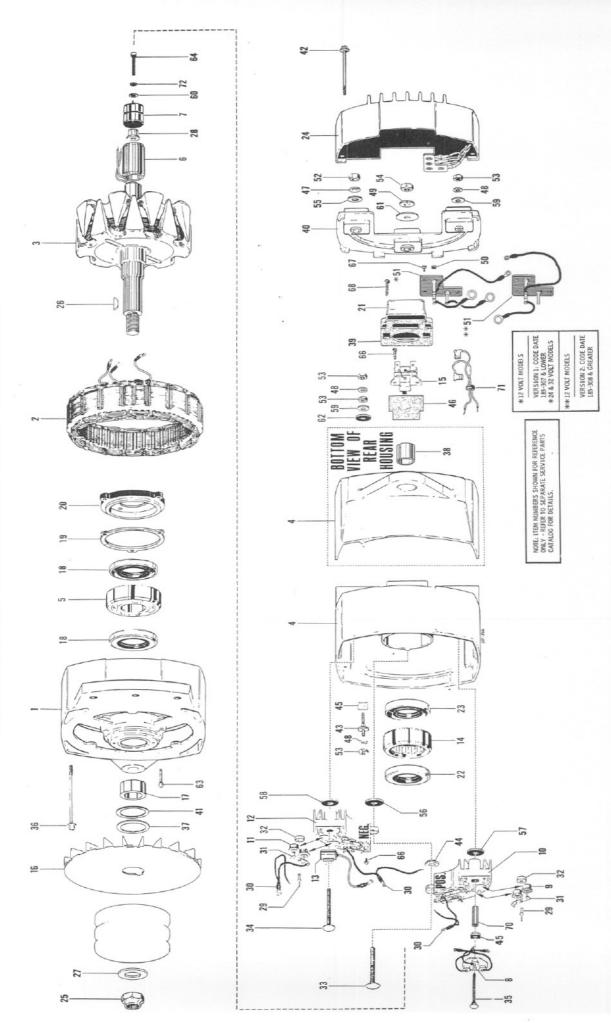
12, 24 & 32 VOLT ALTERNATOR EXPLODED VIEW DIAGRAM
